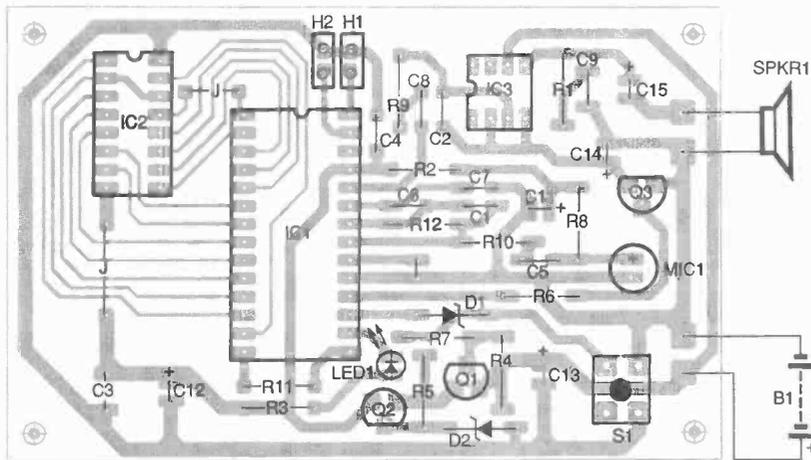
This parts-placement guide should make assembly on a PC board easier.
